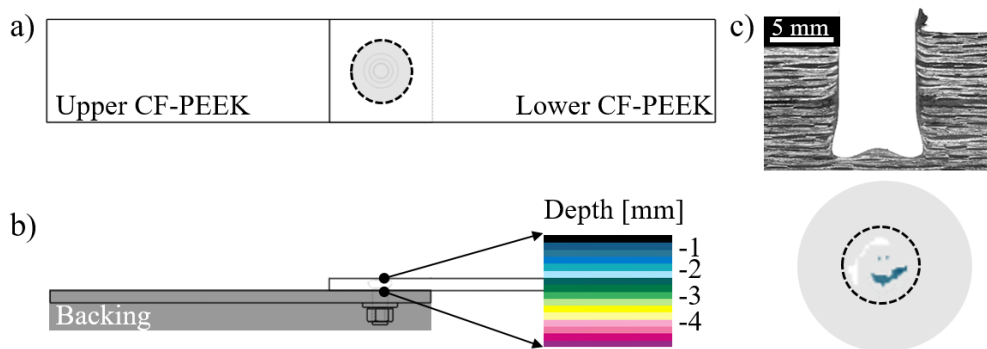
a) Schematic illustration of the bottom view of the joint, highlighting the region of US measurement; b) side view of the friction riveted joint, showing the selected backing surface and the scale of the defect depth based on the lower composite thickness; c) typical cross-sectional view of the as-joined friction riveted joint along with US measurement.
